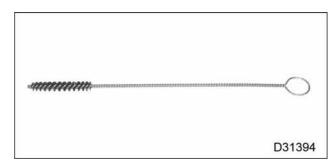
Glow Plug Sleeve Brush (nylon) ZTSE4533
